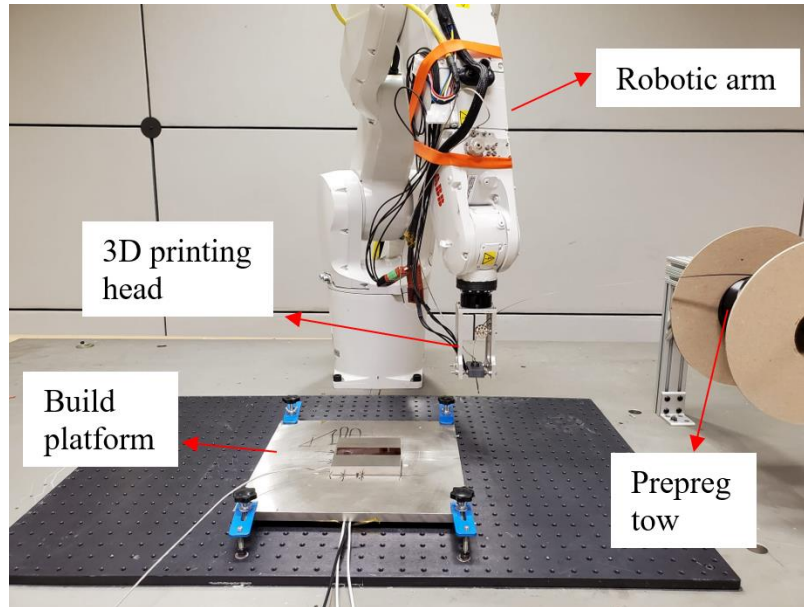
Robotic 3D printer with a custom-built head for processing PAEK-CCF.
